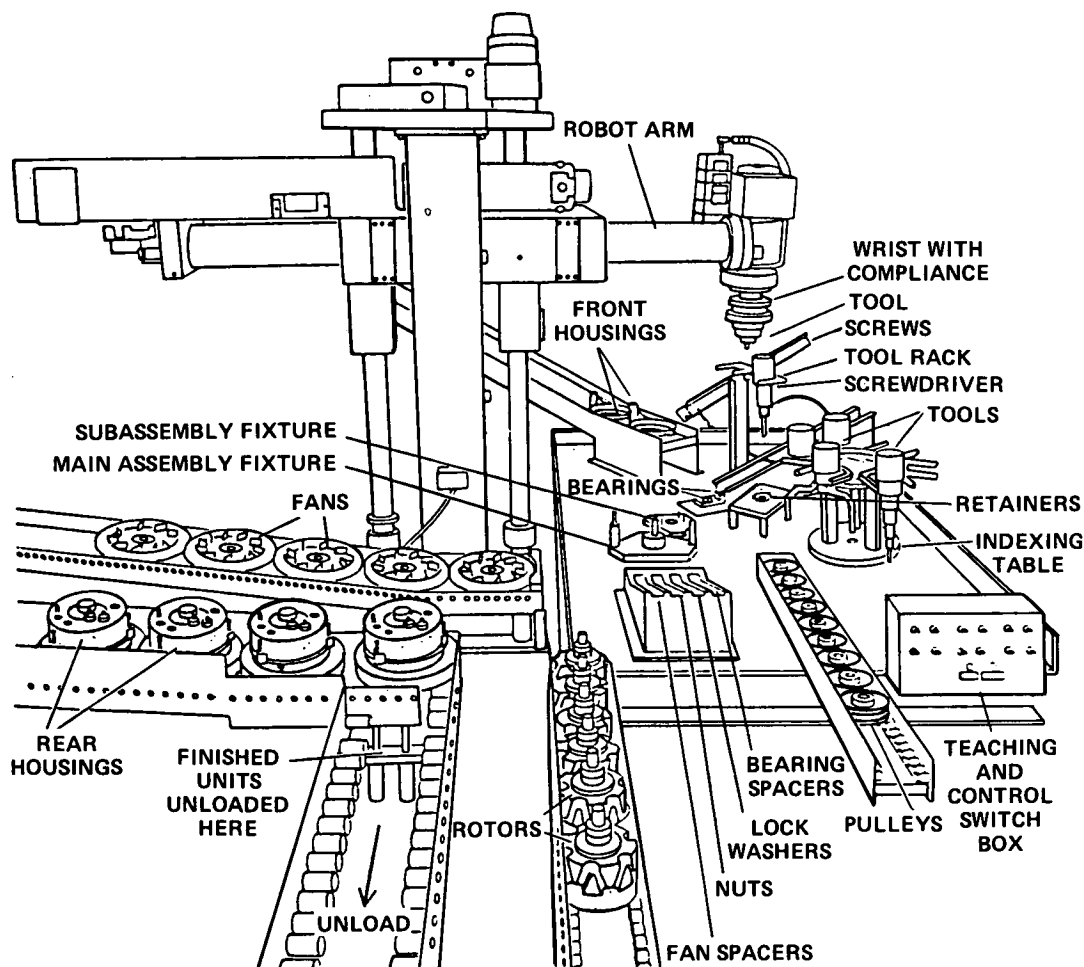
Functional components of the Draper automobile alternator assembly robot. (Nevins and Whitney, 1978.)
